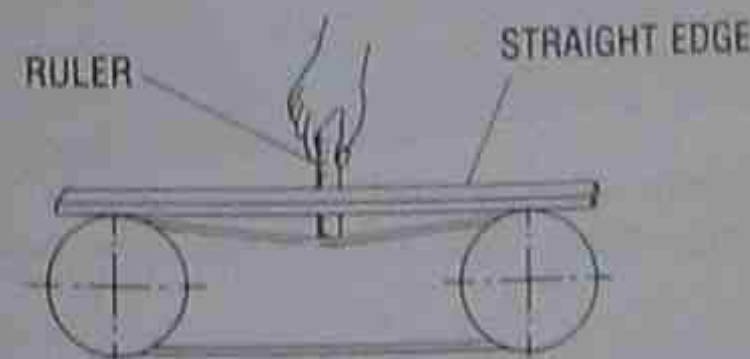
Checking belt tension by depressing the belt and measuring the deflection.
